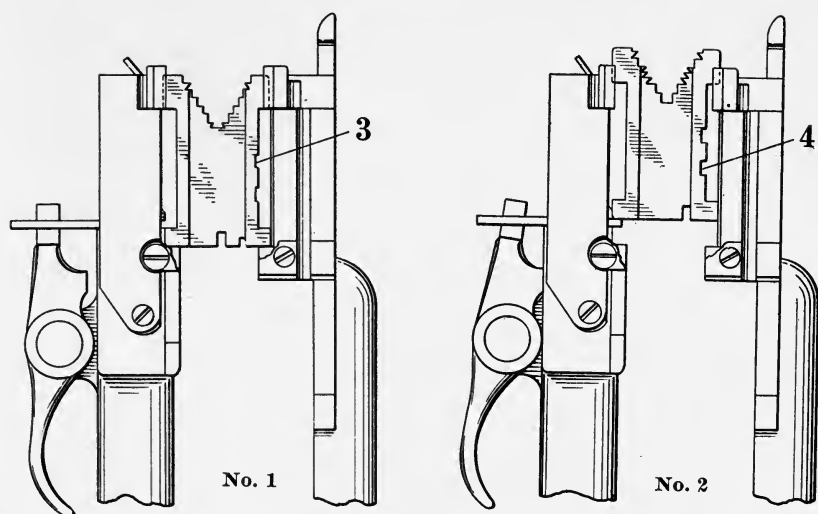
Detail End Diagrams of the Assembling Elevator showing how matrices are assembled in upper and lower positions in order to cast different faces of type from one of the two matrix cells.
